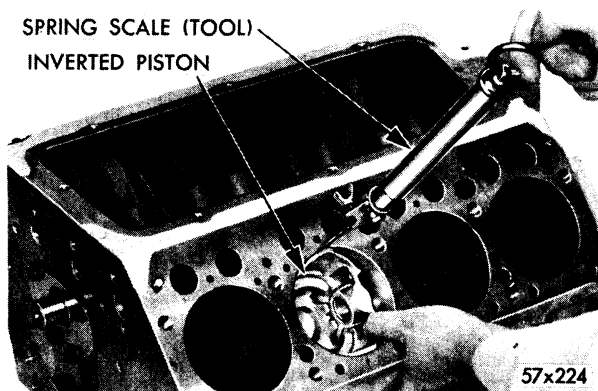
Fitting Piston to Cylinder Bore (FirePower)
